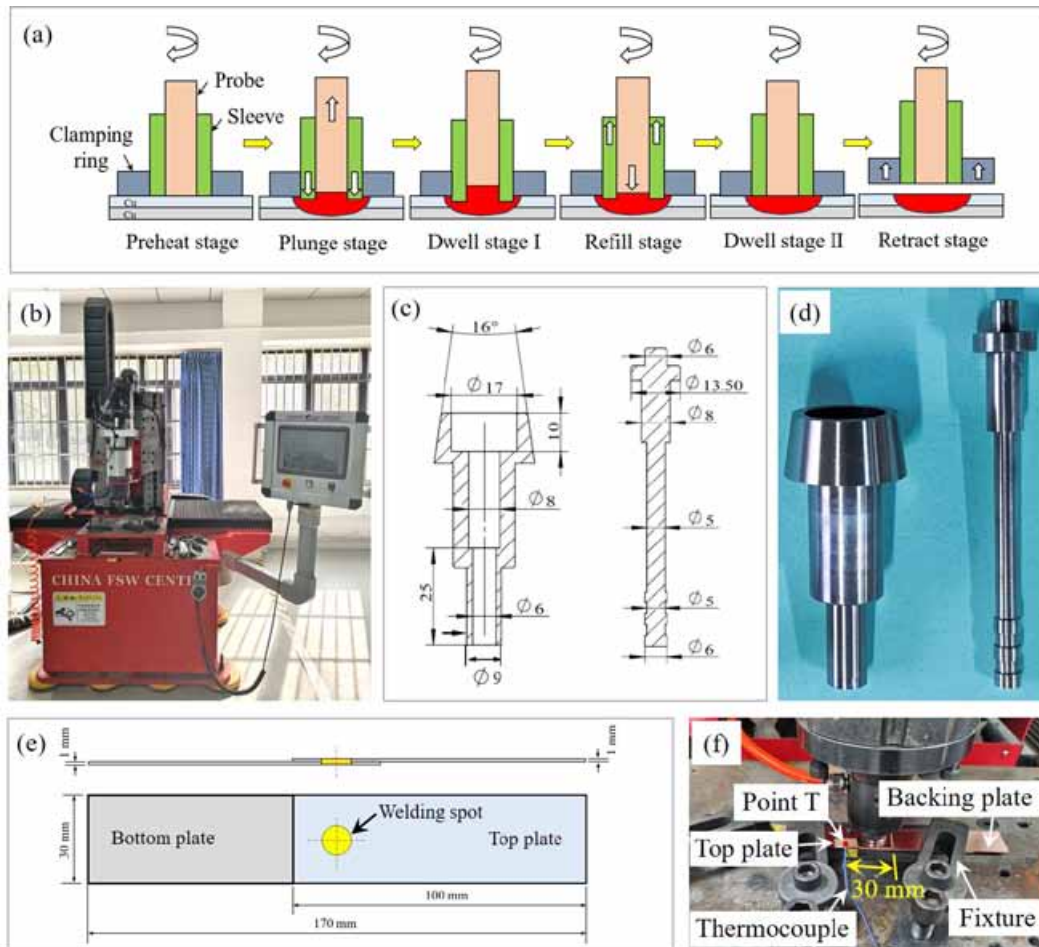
Welding principles and equipment: (a) Working principle of RFSSW; (b) Welding equipment; (c-d) Sleeve and probe; (e) Dimensions of workpiece; (f) Schematic diagram of welding temperature measurement
